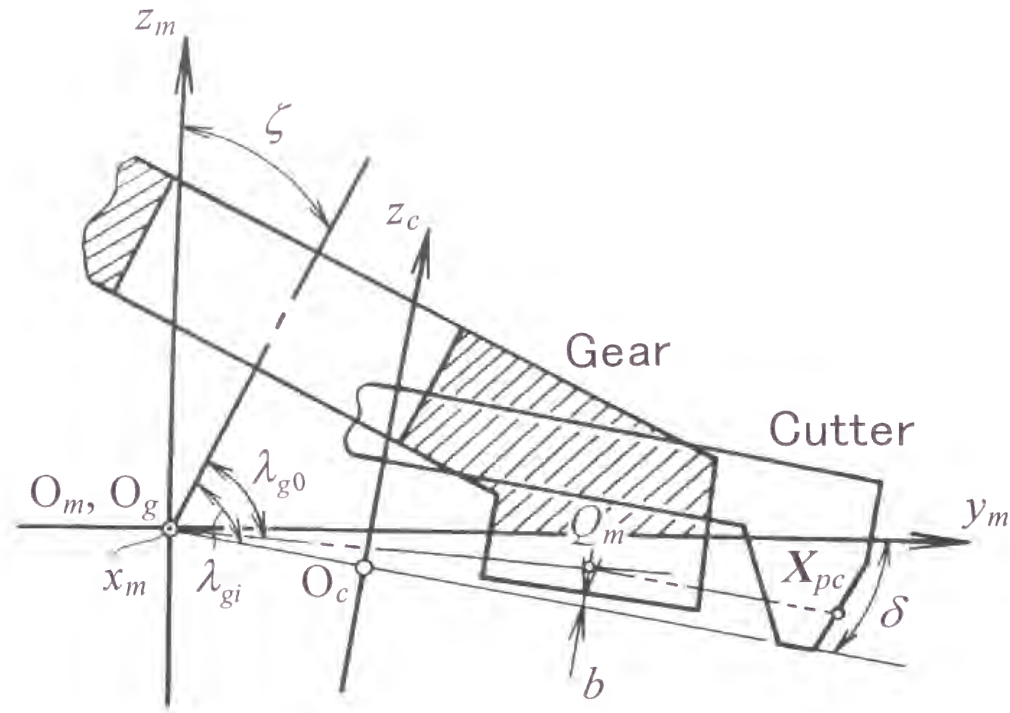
Sketch showing the cutter used for pinion generation and the ring gear
